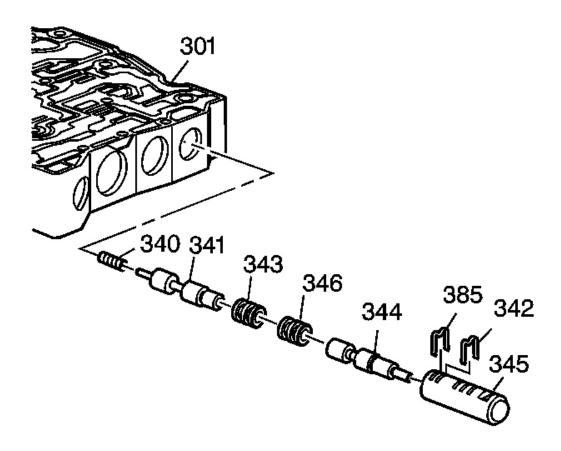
View Of 2-3 Accumulator Valve & 3-4 Accumulator Valve Components Courtesy of GENERAL MOTORS CORP.
